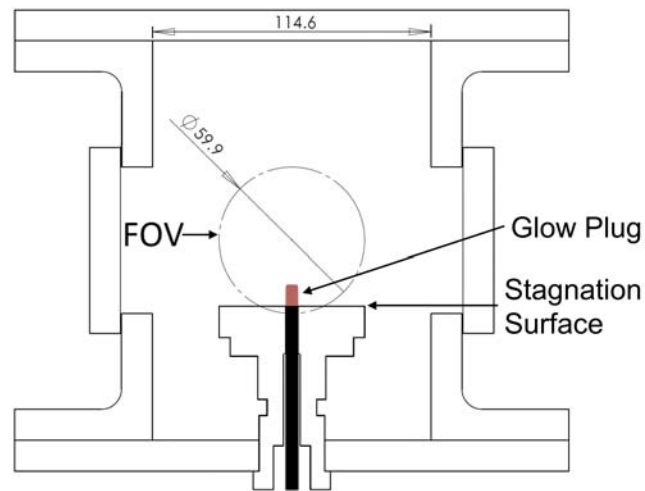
Diagram of the vessel, flow plug mounting fixture with stagnation surface, field of view (FOV), and glow plug (in red), with dimensions in mm
